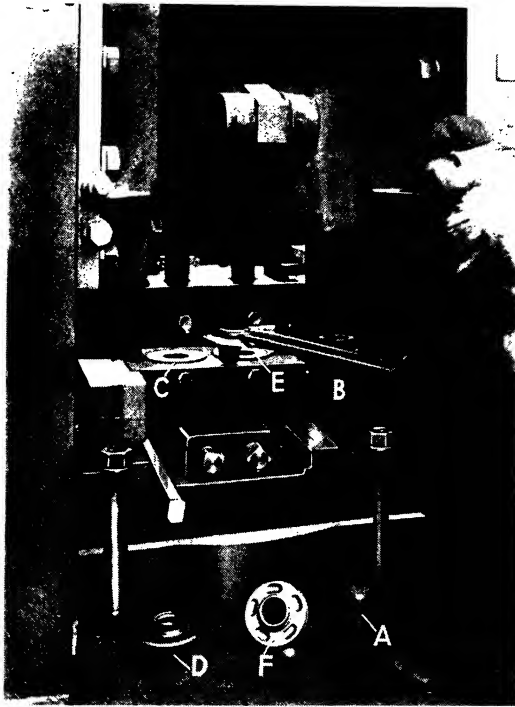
B. DIES IN OPERATION ON A FORGING PRESS
